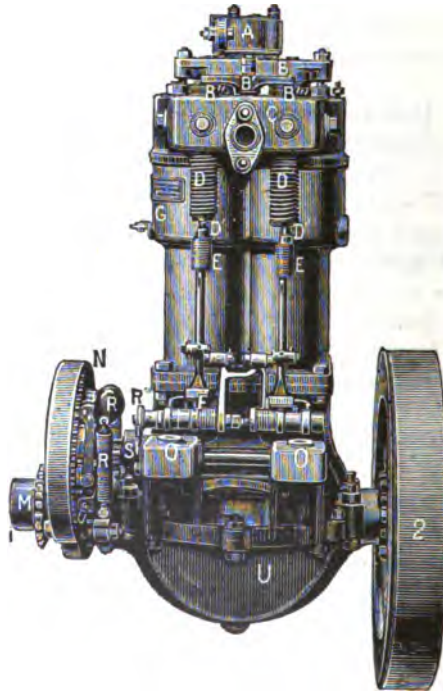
The Phenix-Daimler Double-vertical-cylinder Six-horse-power Motor, as used by Panhard-Levassor. A is the port for admitting fuel gas under piston suction; B, the inlet valve; B', the exhaust valve; C, the ignition apparatus; D, spring on the exhaust valve; D', exhaust valve rod; E, pushrod actuated by the cam; F, governor attachment; N, wheel on the cam shaft, carrying the governor; R, the centrifugal weights of the governor; R', the governor springs; R'', sliding cam shaft; S, the cam actuating the exhaust valves; (2), the engine flywheel carrying the female cone of the main clutch.
